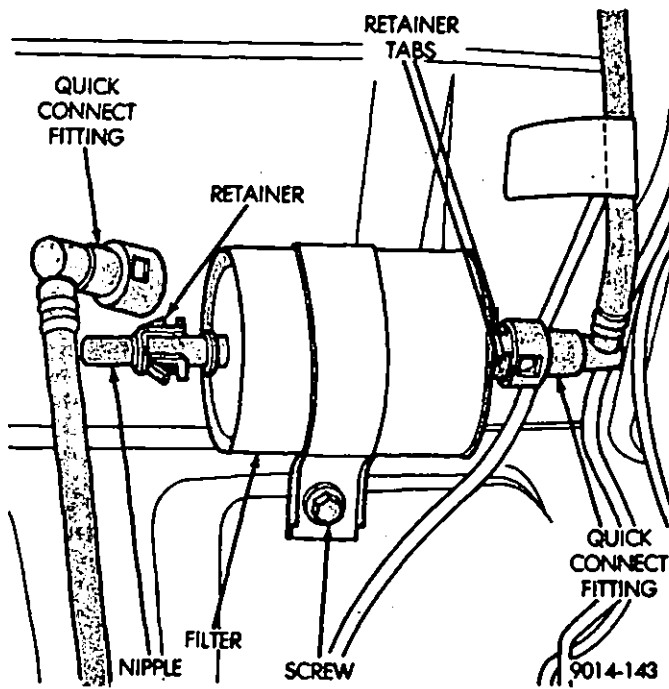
Fuel Supply Tube and Fuel Filter Quick-Connect Fitting
